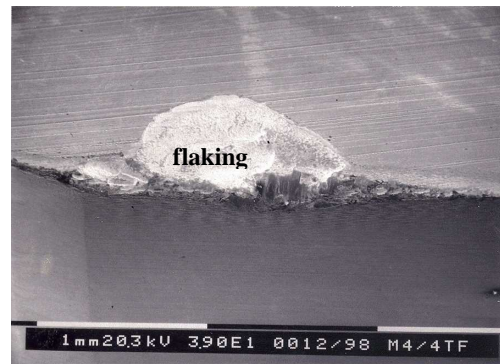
Severe flaking on Tool B after face milling Ti-6246 for 16 minutes at 55 m/min
